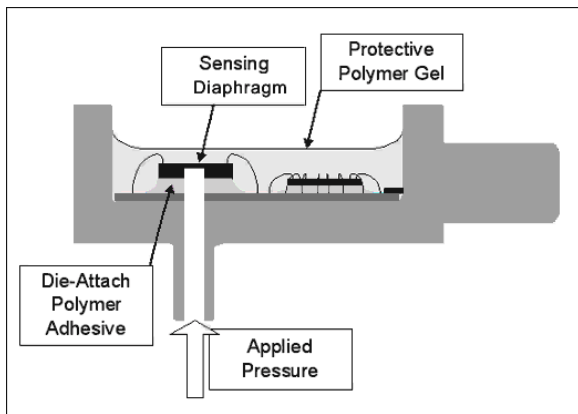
Shows a cross section drawing of a typical automotive pressure sensor.
